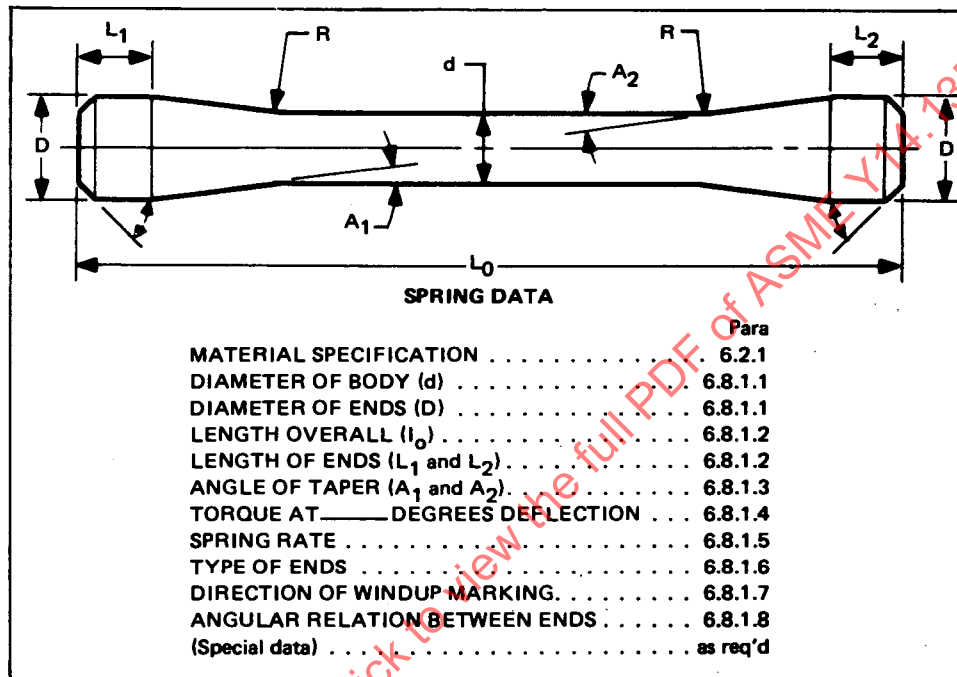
DRAWING REQUIREMENTS FOR TORSION BAR SPRINGS
